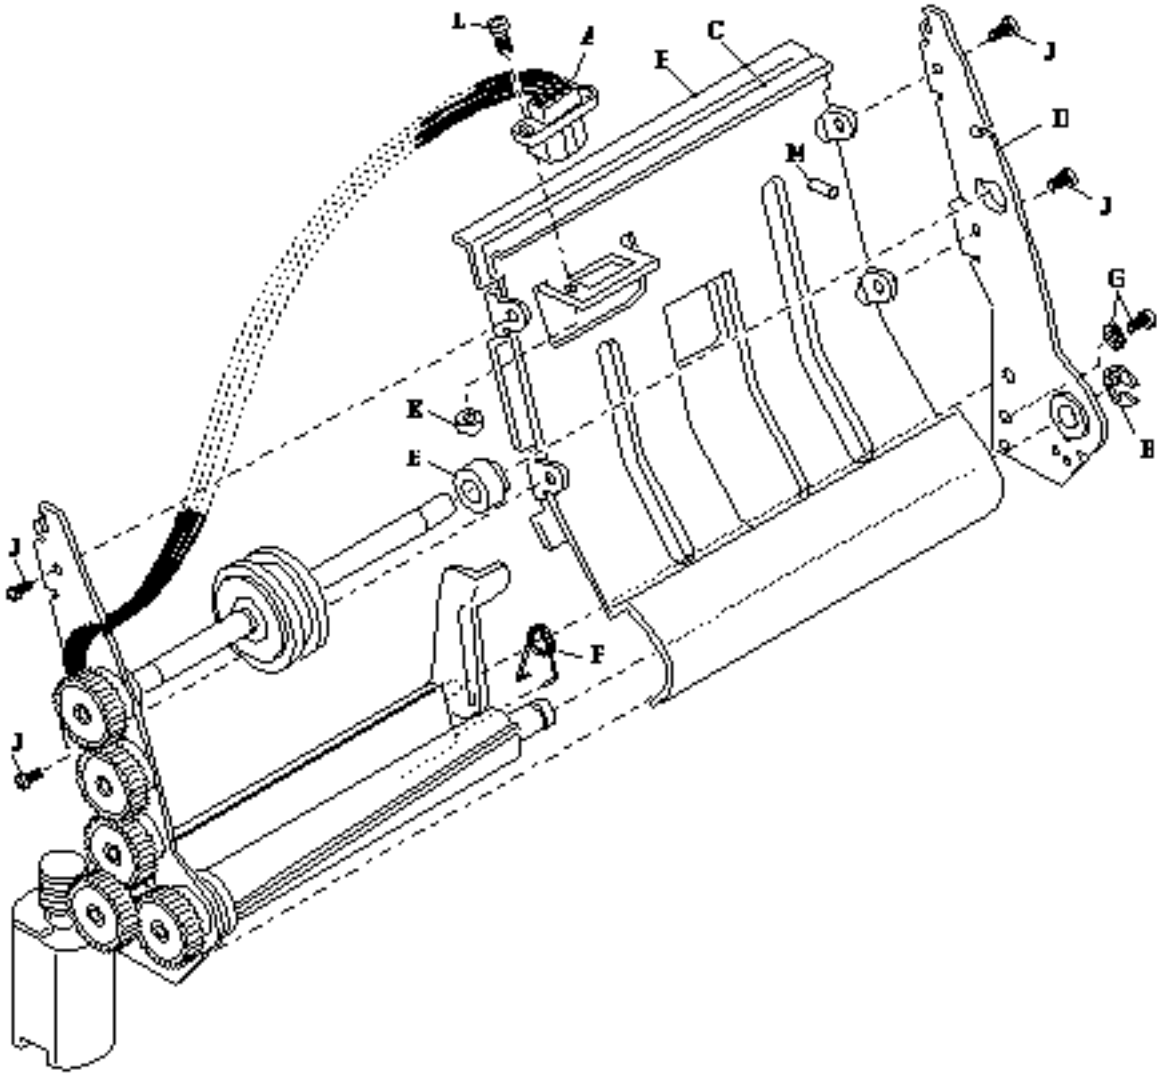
Transport-Auto Cutter Assembly (1 of 2)
